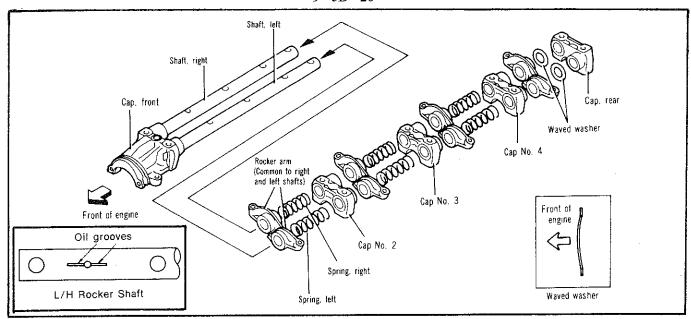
Rocker arm shaft assemblies (belt drive camshaft type)
